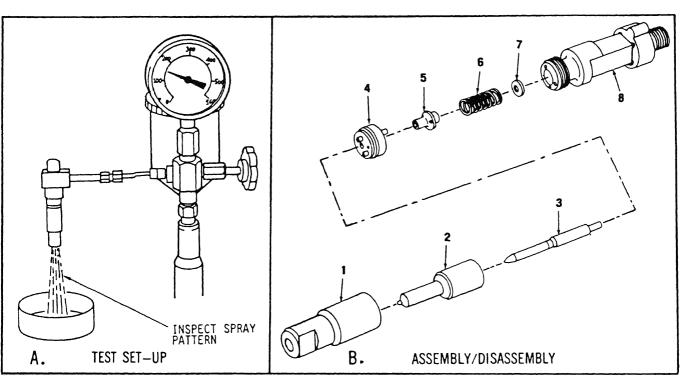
Injection Nozzle, Test Set-up/Assembly/Disassembly
